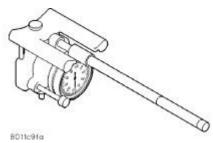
CYLINDER INDICATOR - C-119 Courtesy of CHRYSLER LLC
